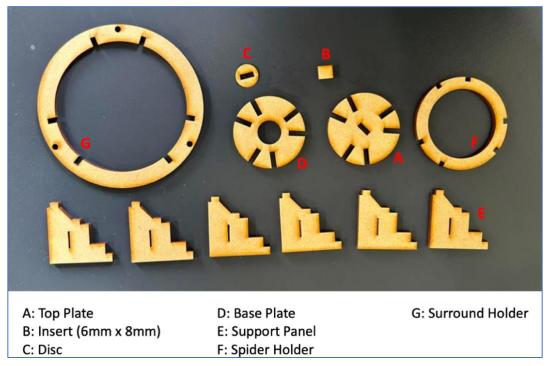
The twelve laser cut parts that form the speaker driver chassis
